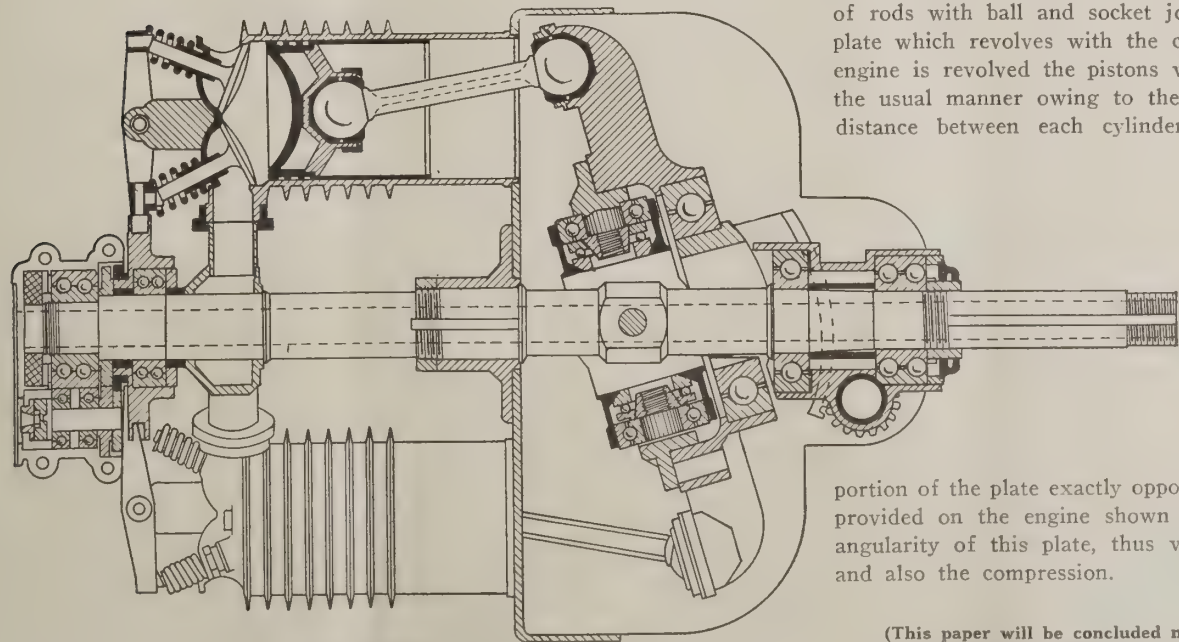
Cross-Section of the Macomber Revolving Engine.
